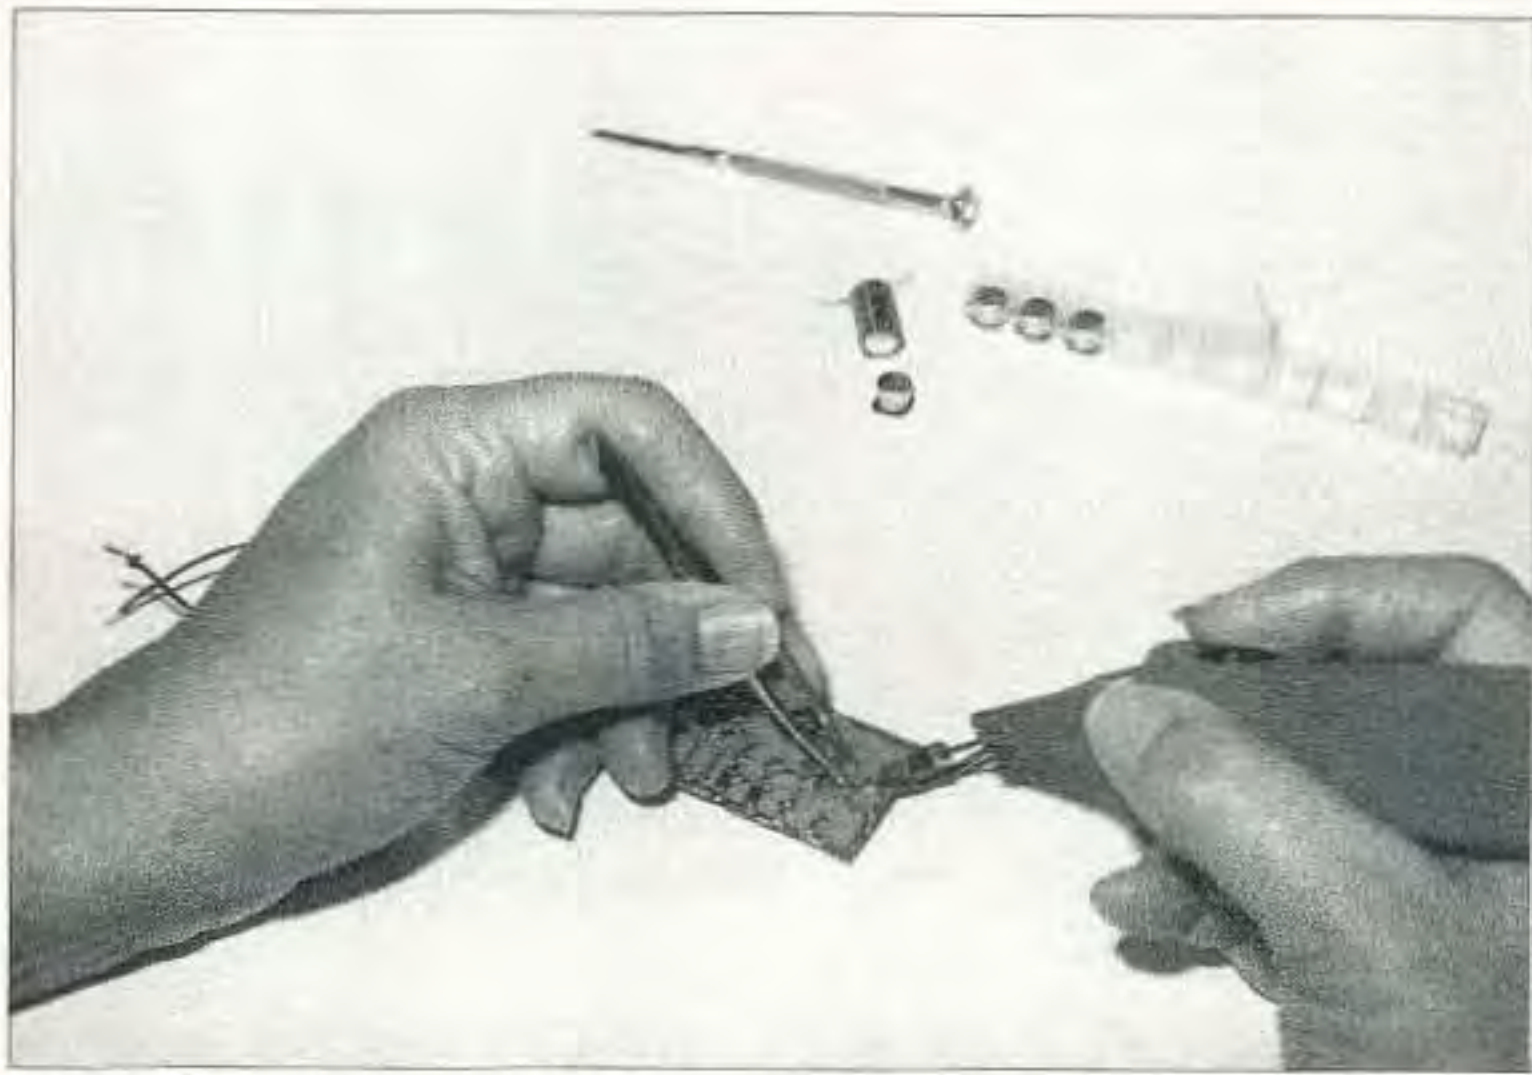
Photo A. Soldering the SMD component into the PC wiring with a battery iron.
